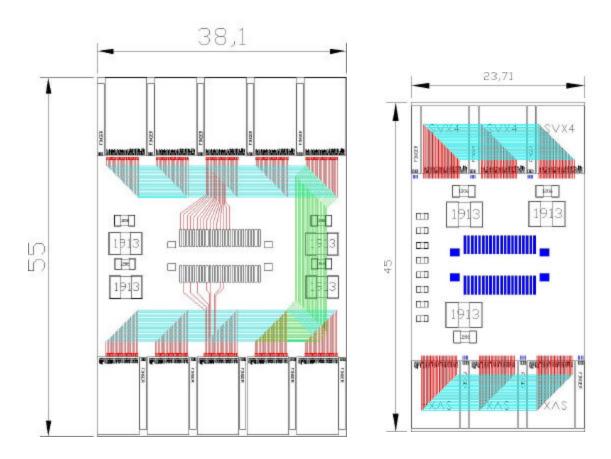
Double-ended hybrid design with two sensors sharing a common readout cable. The axial 10-chip hybrid (left picture) and the 6-chip hybrid(right picture) are shown.
